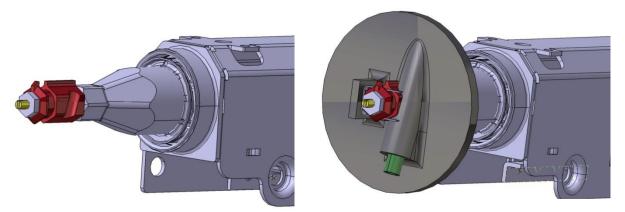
The CAD model of the prototype for the asymmetric steering column pivot with angled screw and Snap-Lock together with the steering wheel interface.
